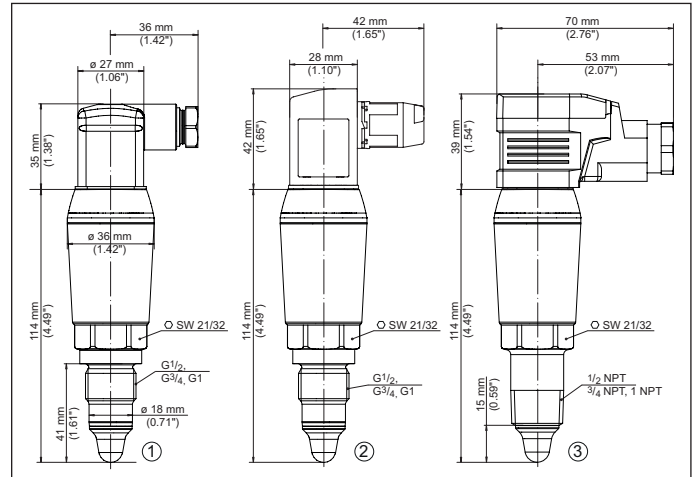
VEGAPOINT 31, standard version - thread with valve plugs acc. to ISO 4400
